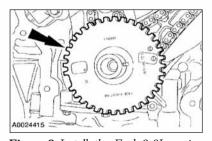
Install the Ford 3.0L engine ignition pulse wheel as shown
